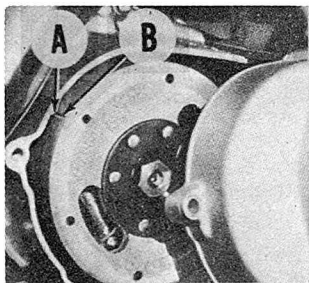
Timing marks (A&B) will be aligned when crankshaft is in correct position for ignition.
